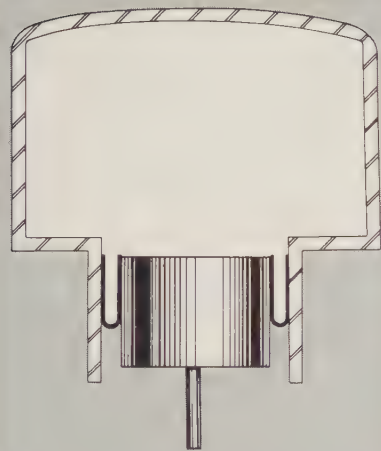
In a practical automotive installation, an adequate air seal could not be obtained in the fundamental type shown in Fig. 2 without excessive cost penalty. A wide-clearance design having a rolling seal was then proposed. This type would eliminate any problems of sealing and of manufacturing tolerances.
